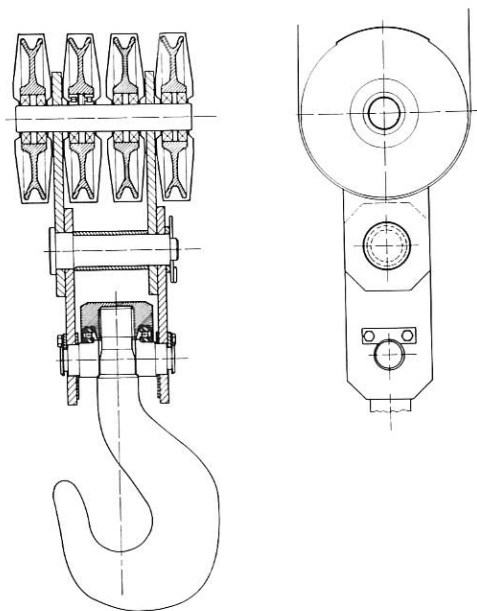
The hook arrangement. The hook can be taken off and load connected to the bolt in order to gain clearance for OH1 coil assembly.
